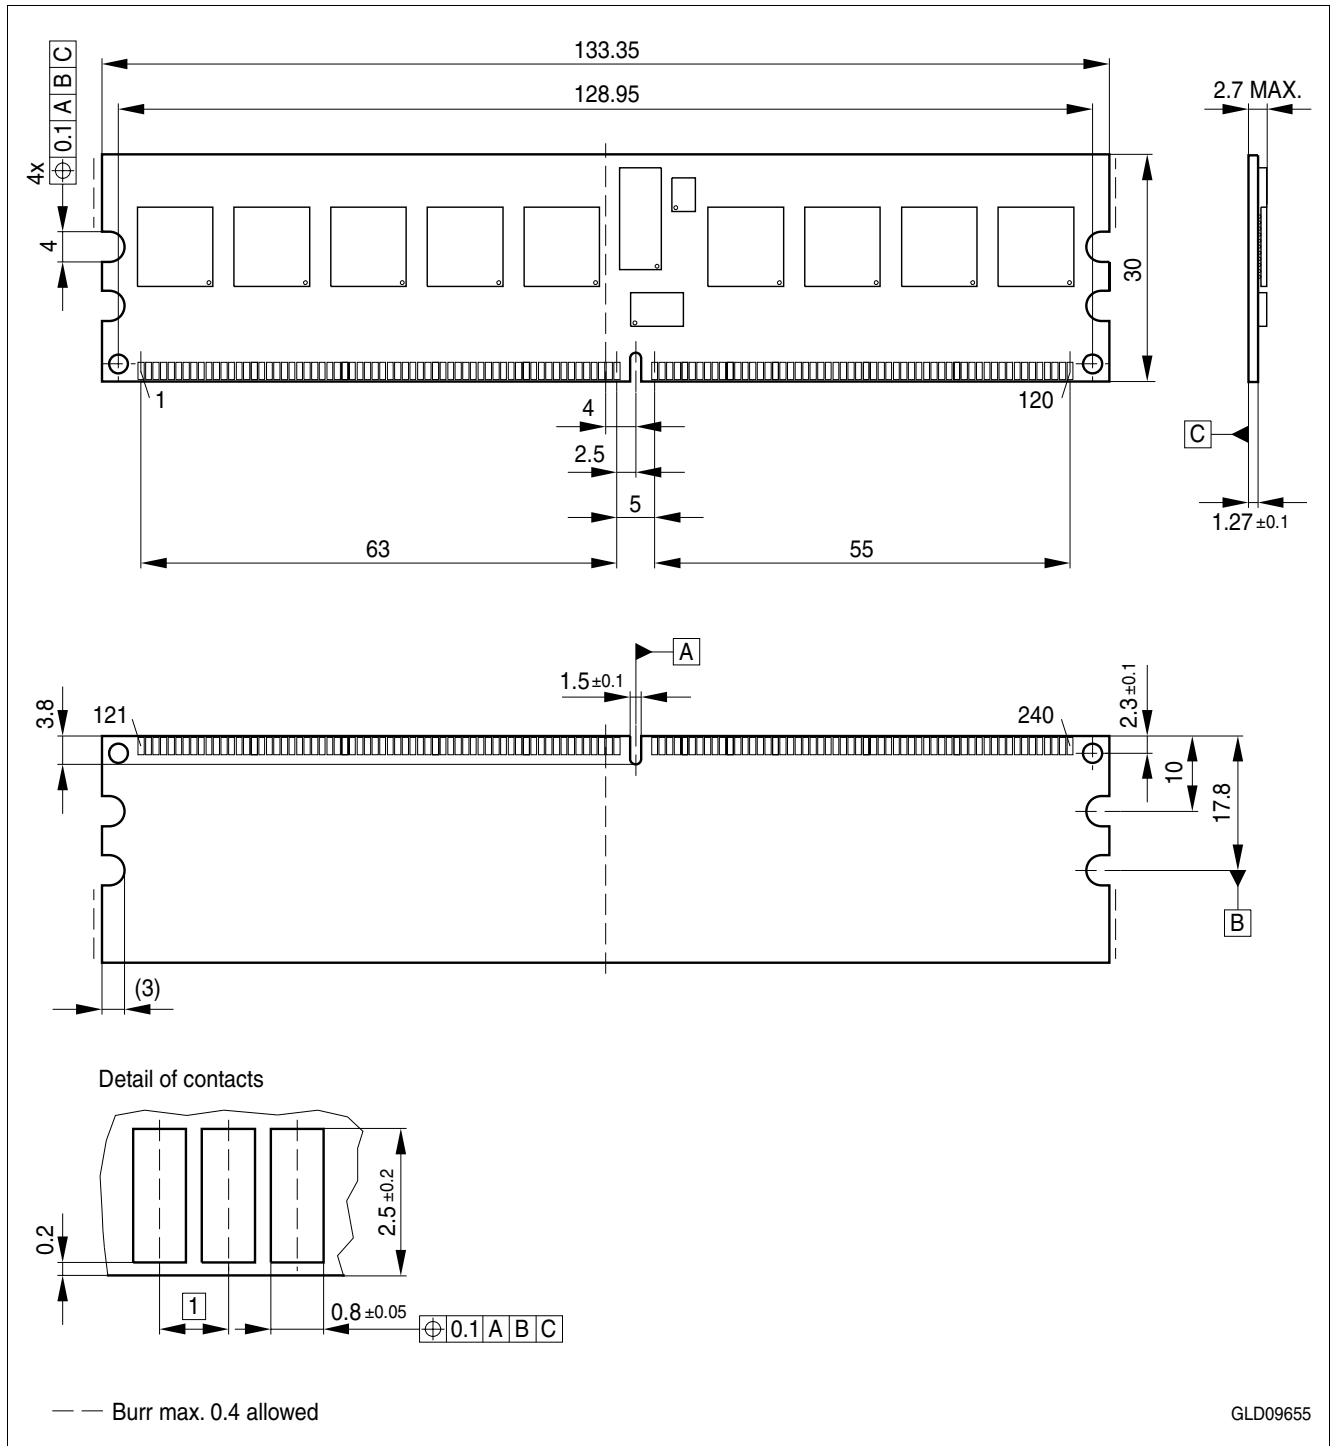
Package Outline Raw Card A-F L-DIM-240-11
